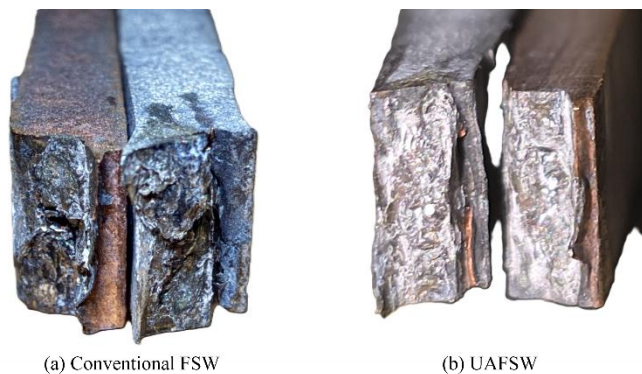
Fractographic images a) Conventional FSW b) UAFSW
